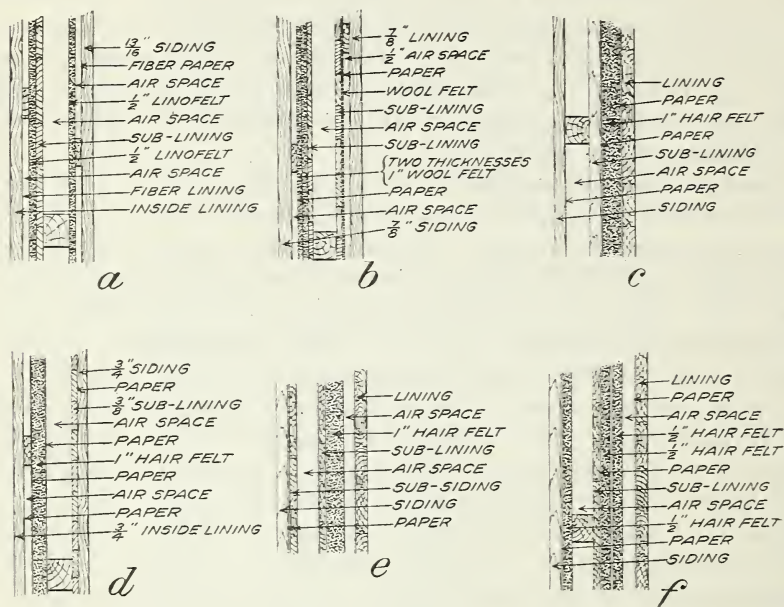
Cross sections showing wall construction of different types of refrigerator cars. *a,* Type A; *b,* type B; *c,* type C; *d,* type D; *e,* wall having a 1-inch layer of hair felt; *f,* wall having three half-inch layers of hair felt.
